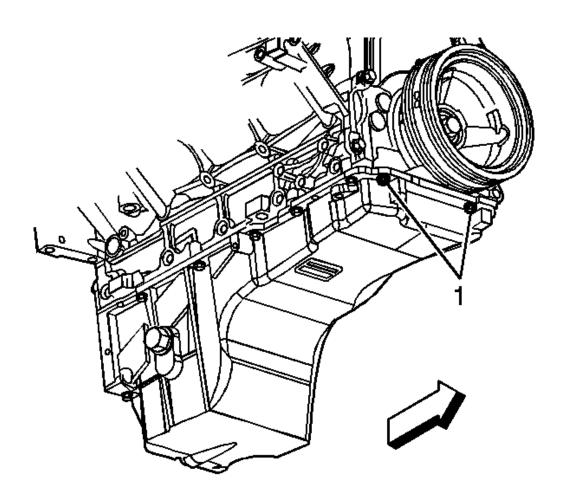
View Of Oil Pan-To-Front Cover Bolts Courtesy of GENERAL MOTORS CORP.
